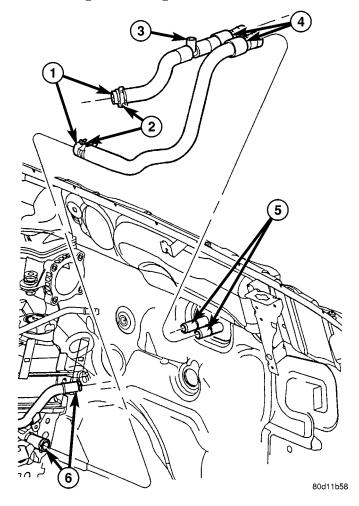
HEATER HOSE ASSEMBLY- RHD 1.6L
